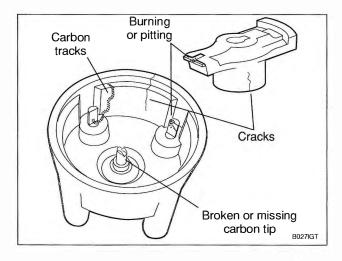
Distributor cap and rotor. Inspect cap and rotor at contact points.
